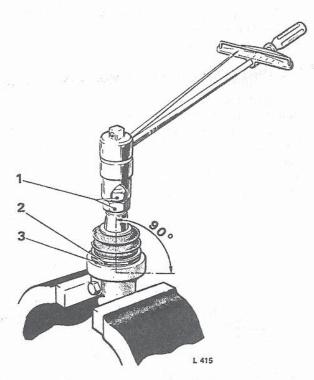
SETTING DAMPER BALL JOINT PRE-LOAD
